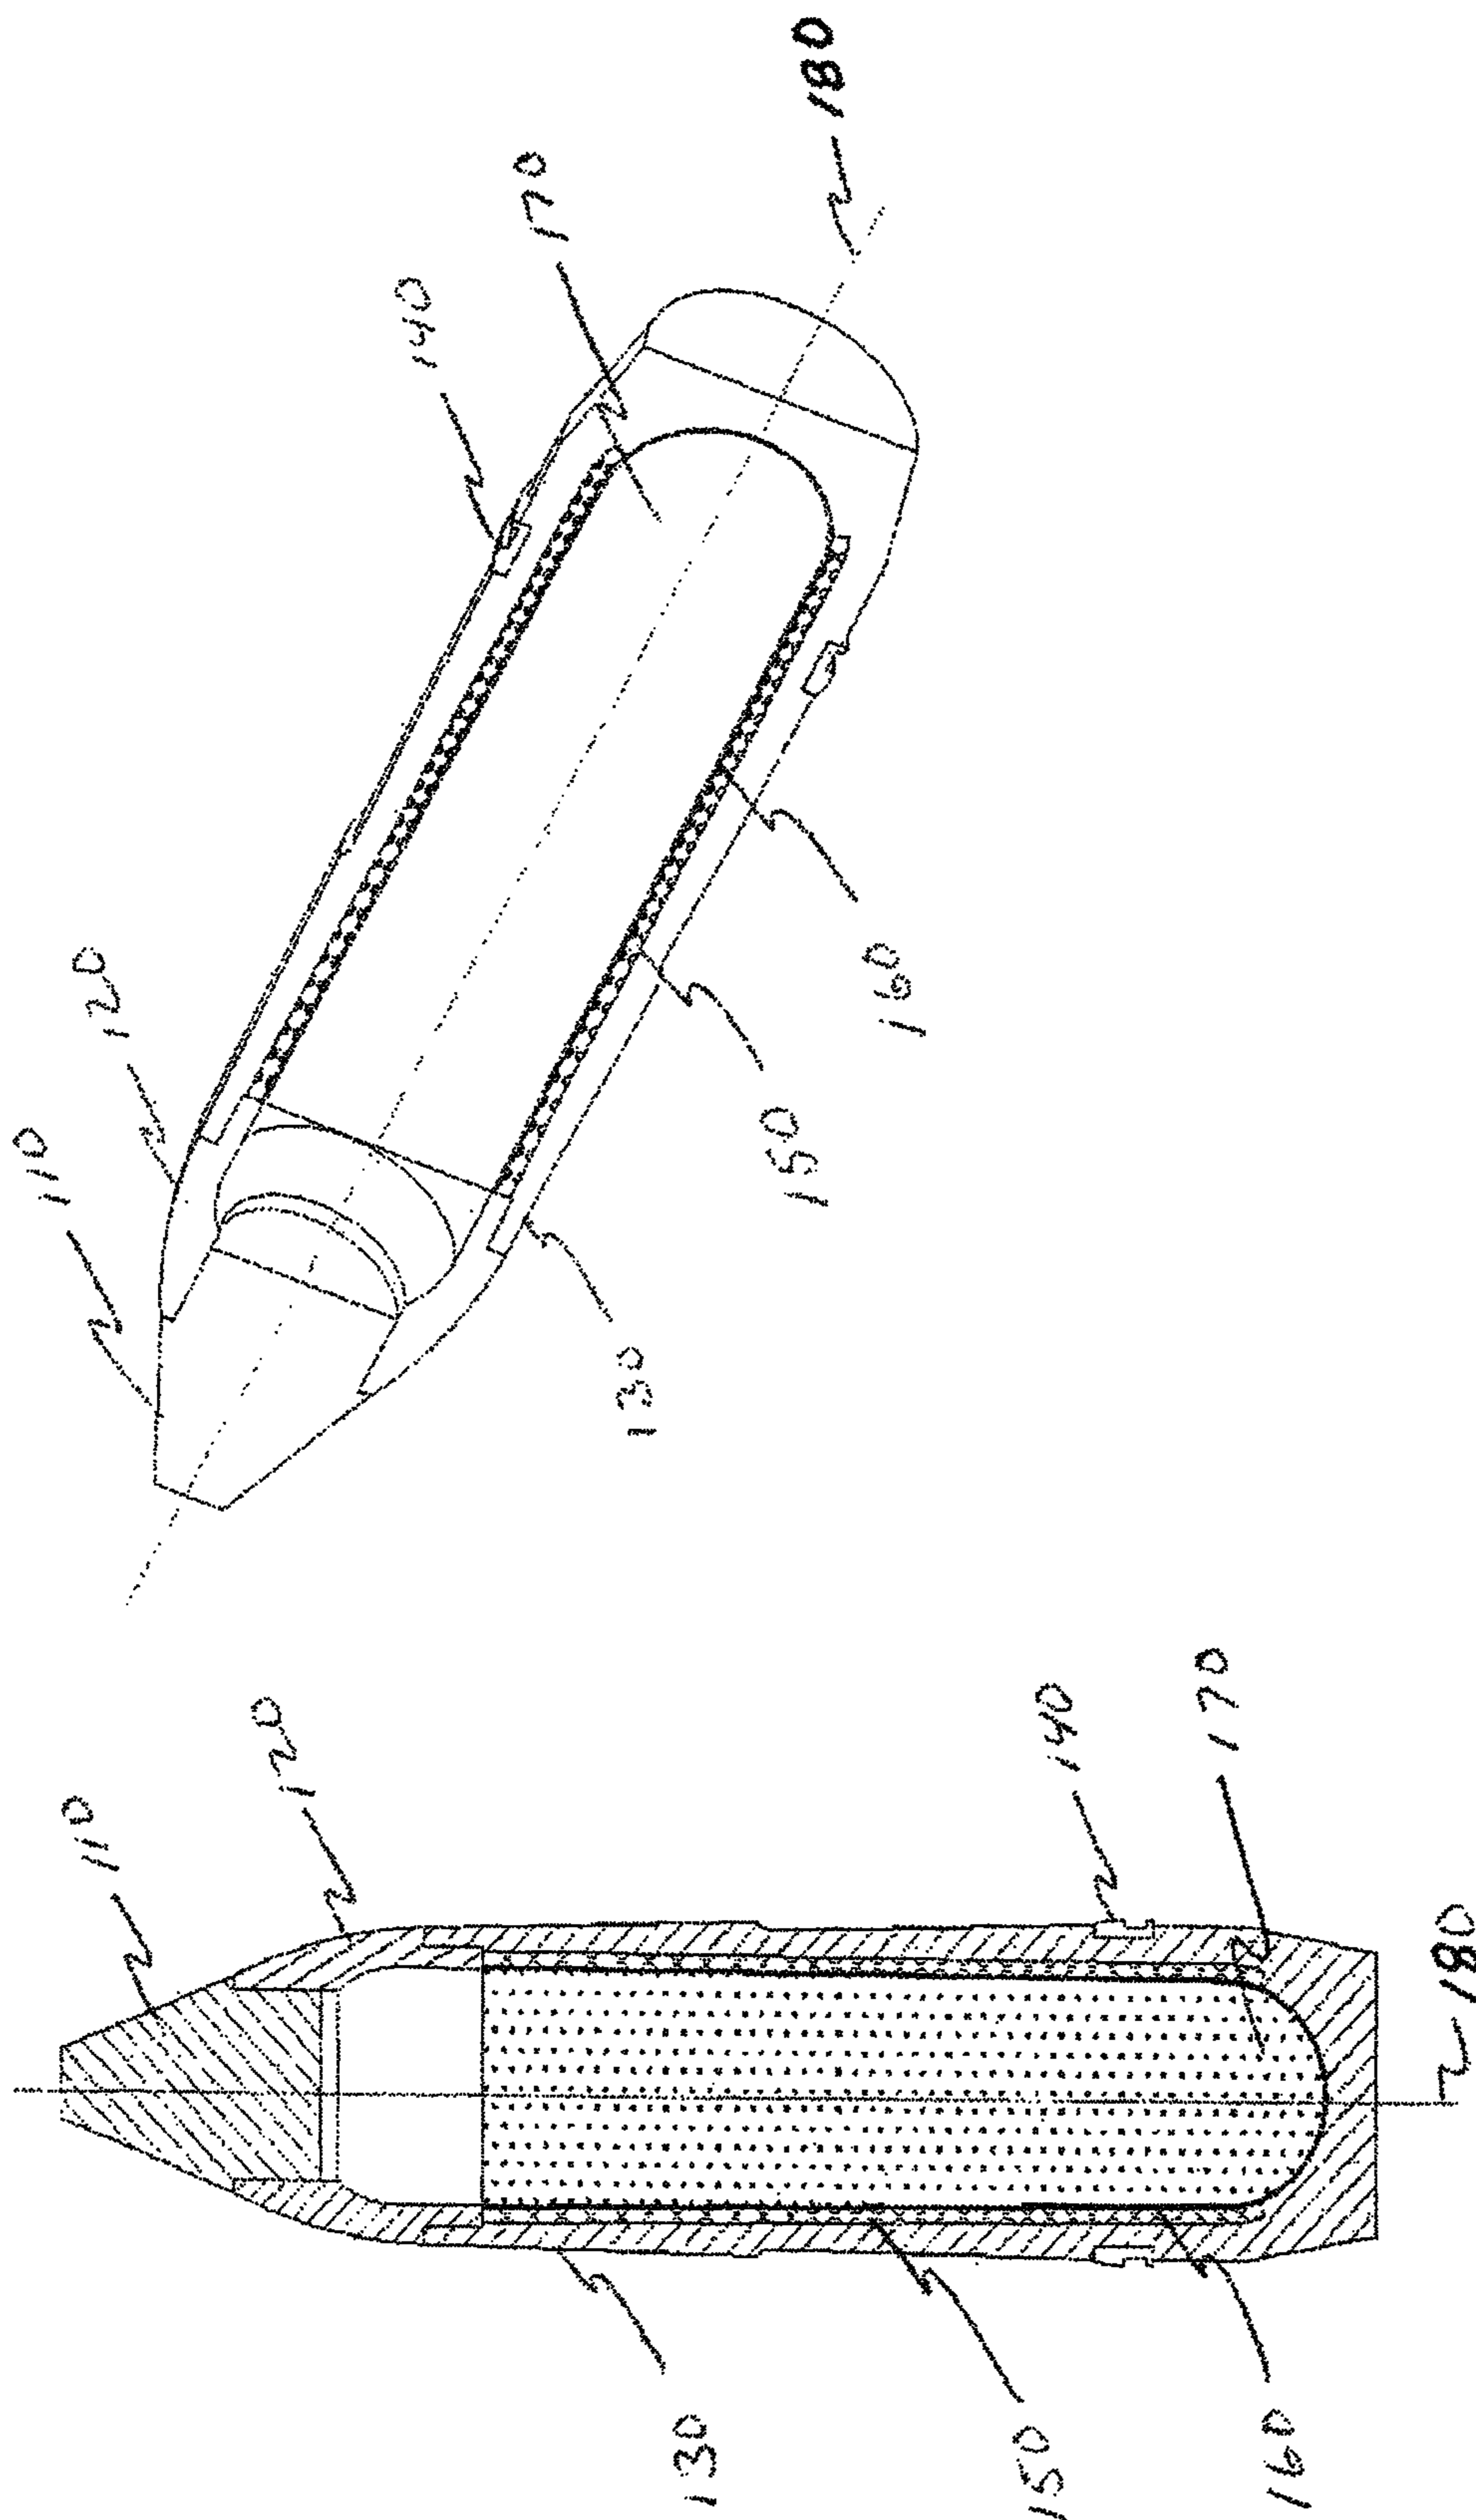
B – Cut Away Views 105mm Warhead (Assembly)
